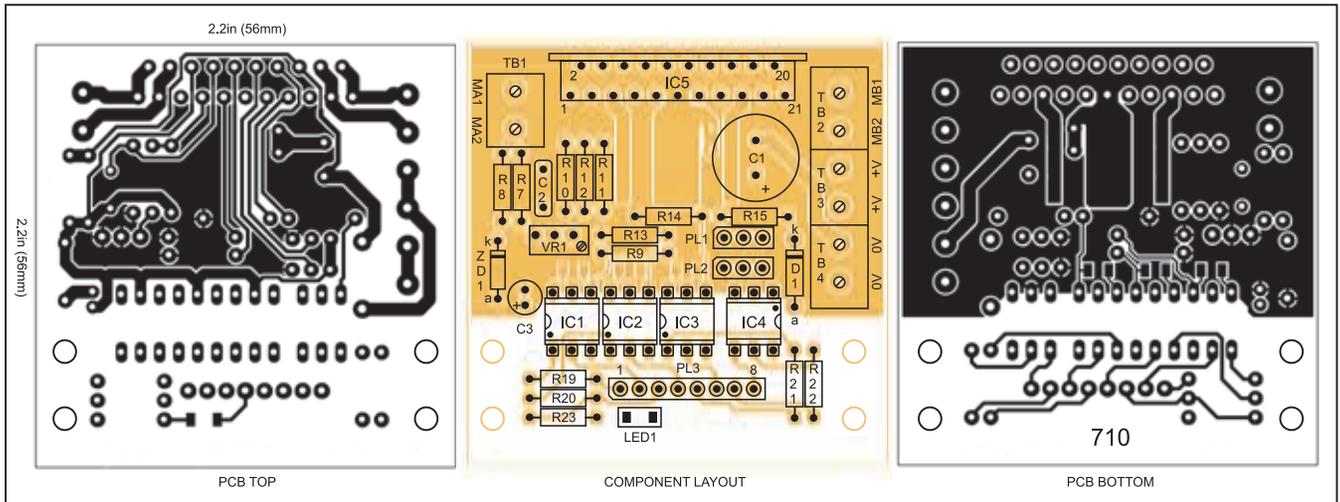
Stepper motor driver printed circuit board component layout and full size copper foil masters for the topside and underside of the board
